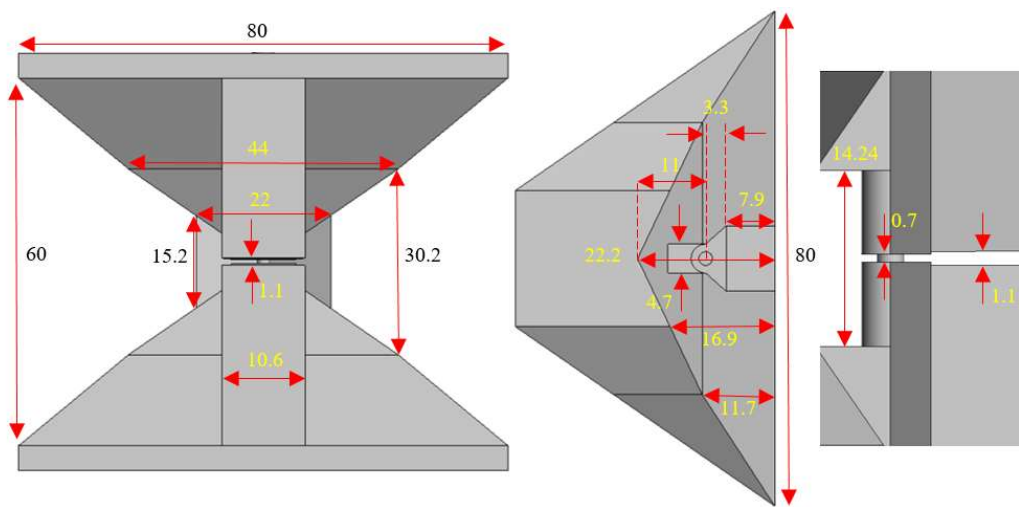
Flared waveguide and sidewall design, dimensions in mm.
